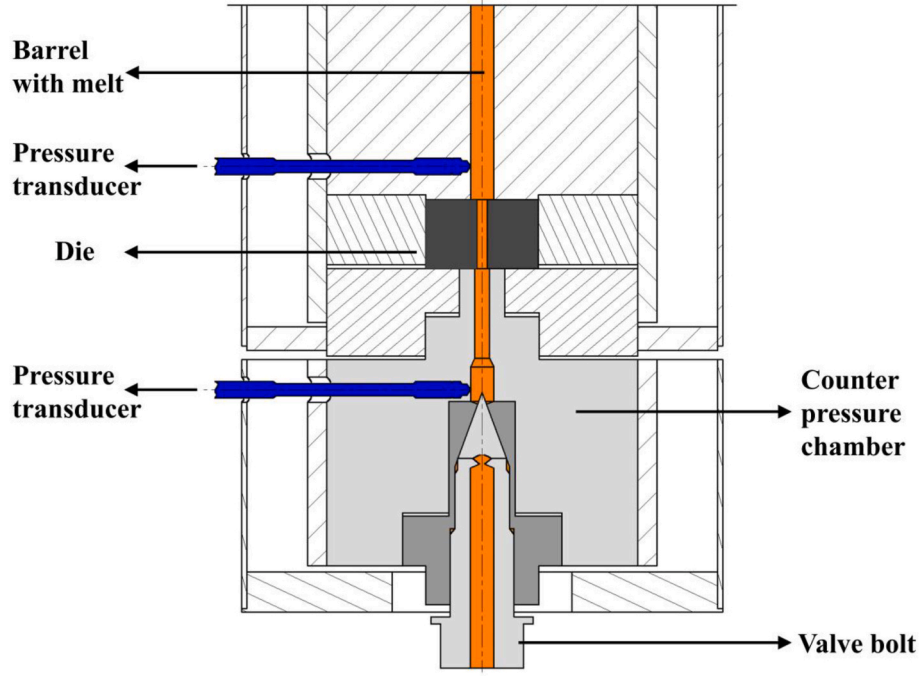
Counter pressure chamber assembly fitted below the Rheometer die.
